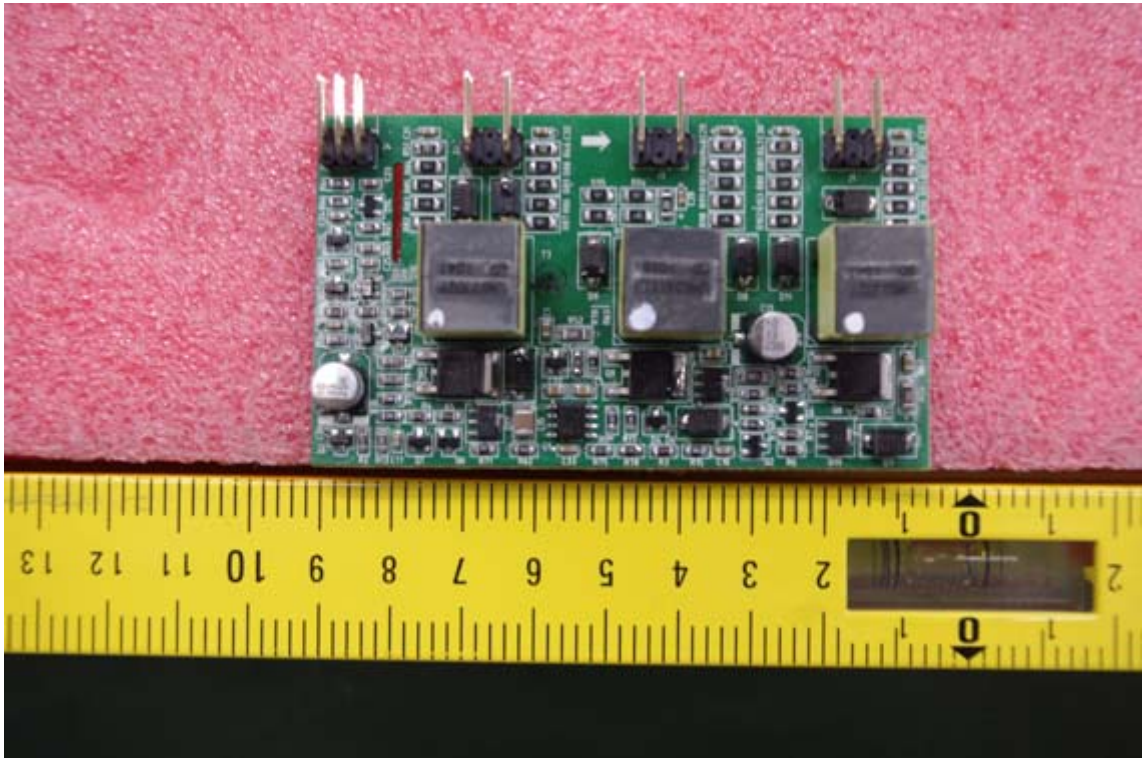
Board SNT_PCB_3320_FQ, components side view
